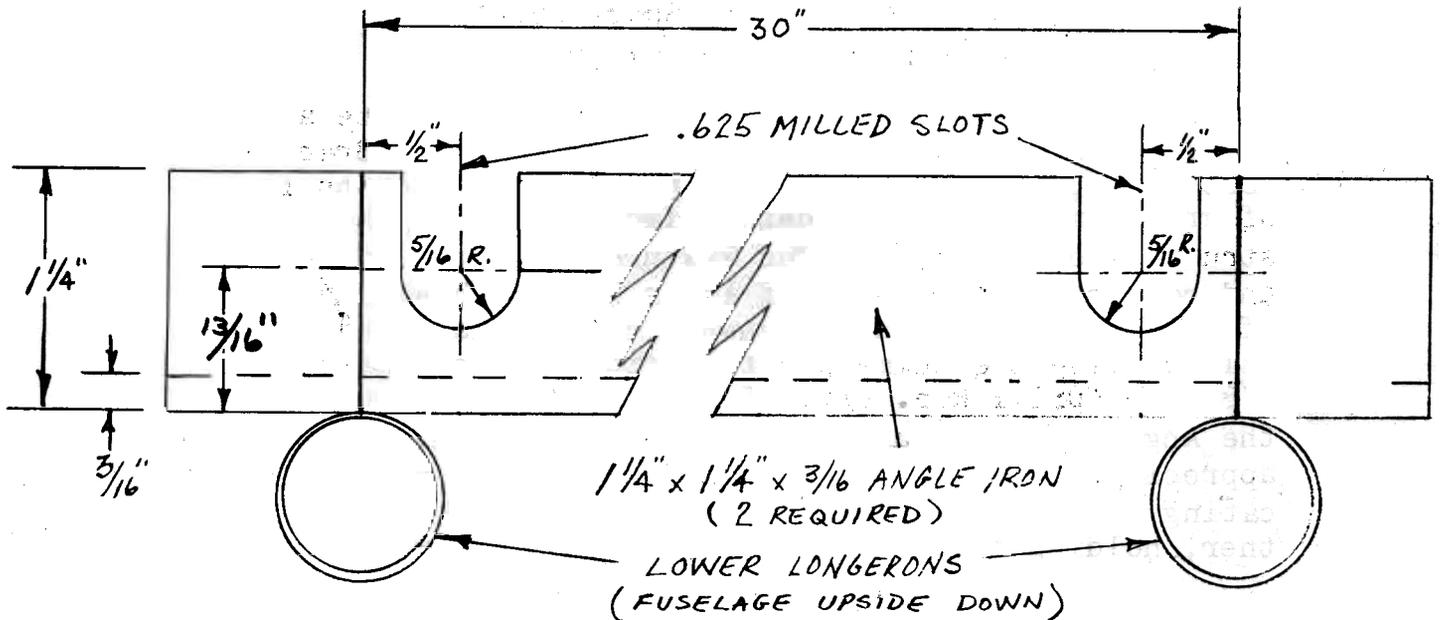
FIGURE: USED TO LOCATE LANDING GEAR FITTINGS.
